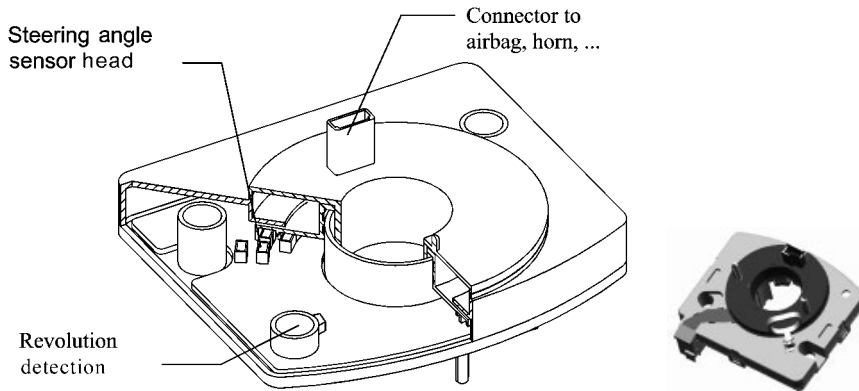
Steering-angle sensor mounted beneath the steering wheel (source: Valeo)
